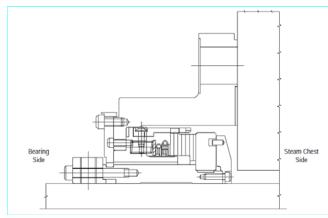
Cross sectional drawing of a mechanical seal installed on a steam turbine to replace its carbon segmental seal into almost zero leak seal based on face grooves similar to dry gas seals in compressors (Image Courtesy : John Crane)
